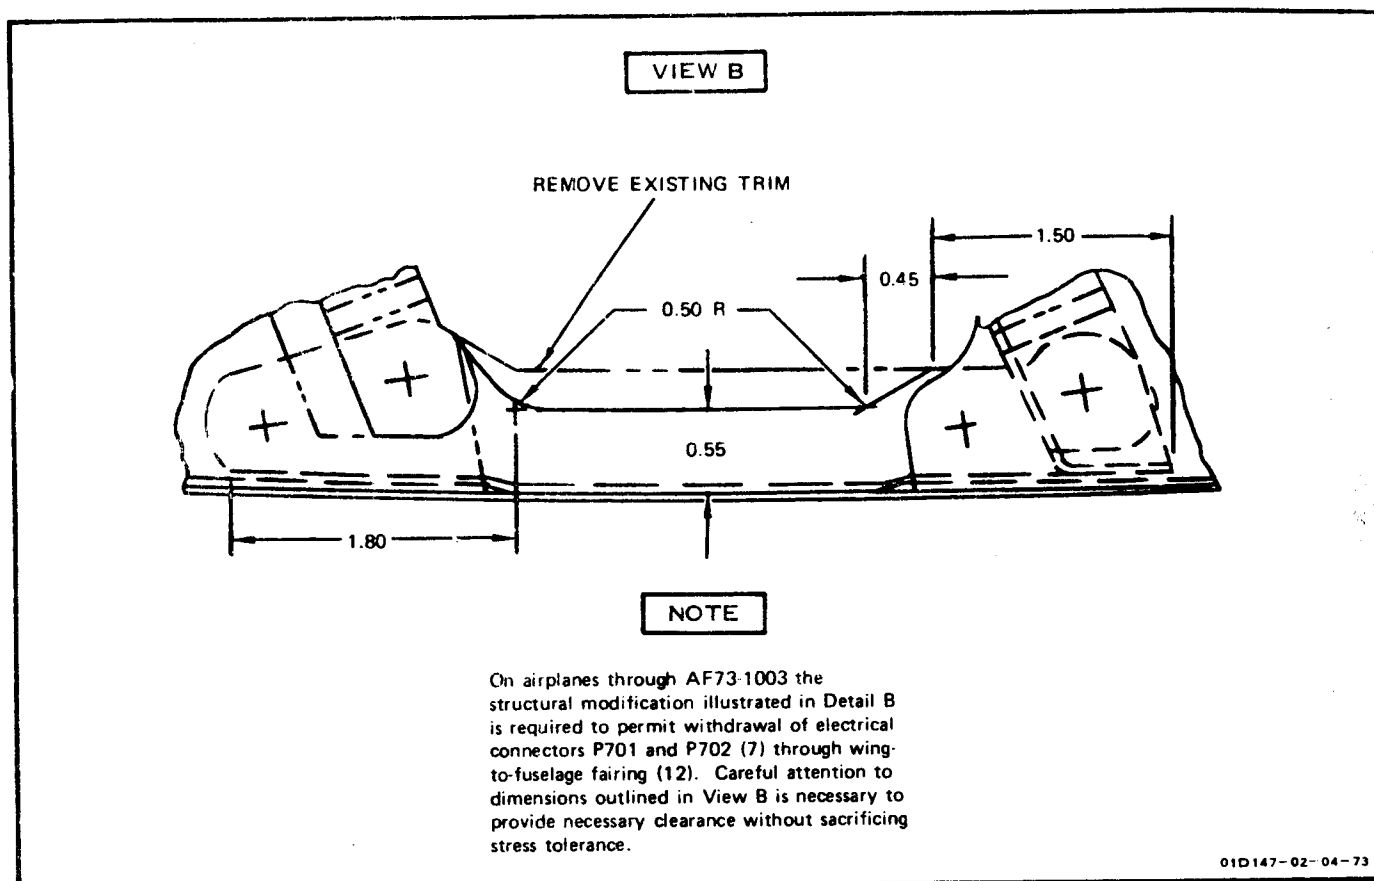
Wing Center Section Leading Edge Fairing/Wiring Harness Assembly Removal and Installation (Sheet 2)
